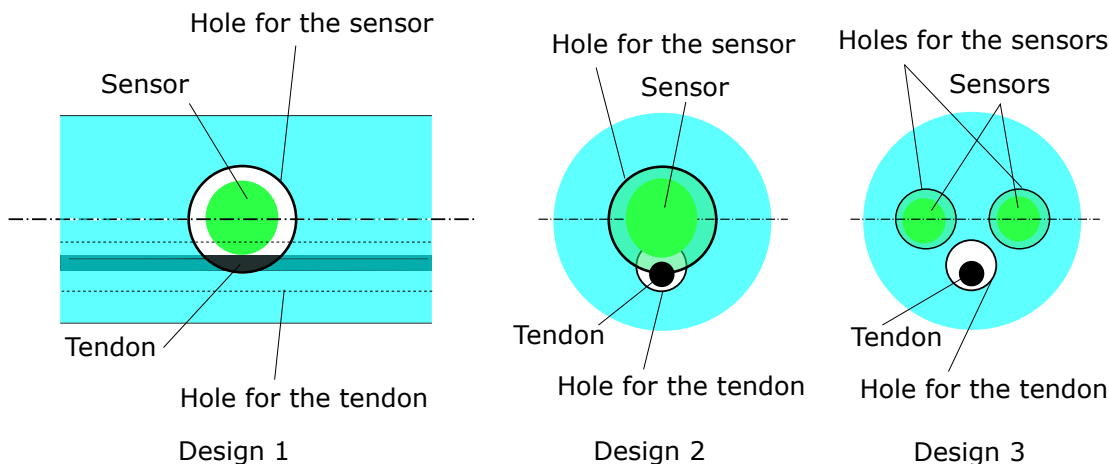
Conceptual scheme of holding the magnetic sensor with the robot's end cap. Design 1: using 1 mm hole to axially fix the sensor. Design 2: using 1 mm hole to fix the sensor in the principal axis. Design 3: Use two 0.5 – mm holes to hold two different sensors.
